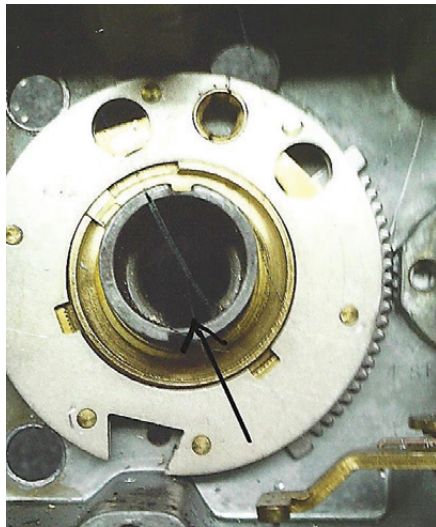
The side of the wheel pack tube was pushed against the inside of the hole of the 1-wheel.
